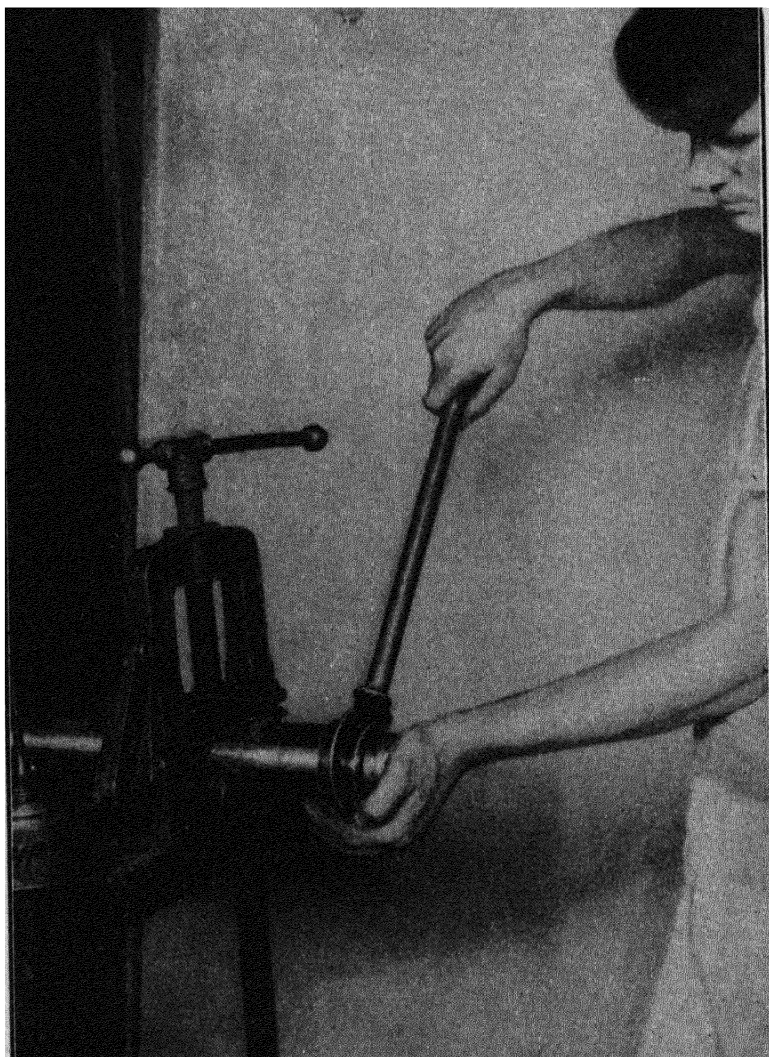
Cutting a thread with a ratchet stock and die.
